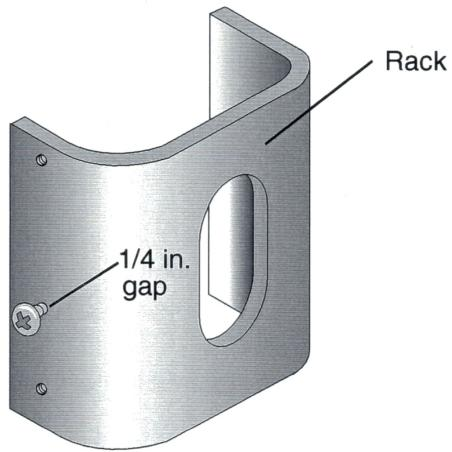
Keyhole Slot Screw with Threads Engaged, and a Gap Adequate to Fit the Mounting Bracket
